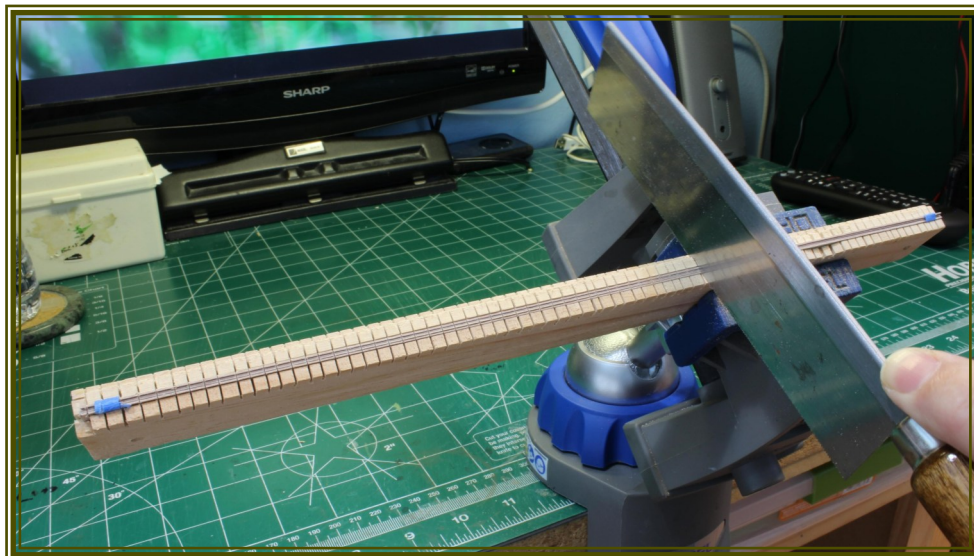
The Dremel vise came in handy when I was cutting wood shingles.
